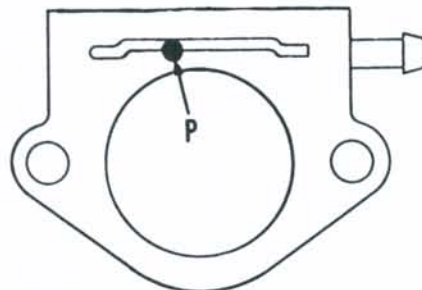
Heat sensitive insulator is identified by presence of metal plug (P) which is absent and hole is filled on later insulators.
